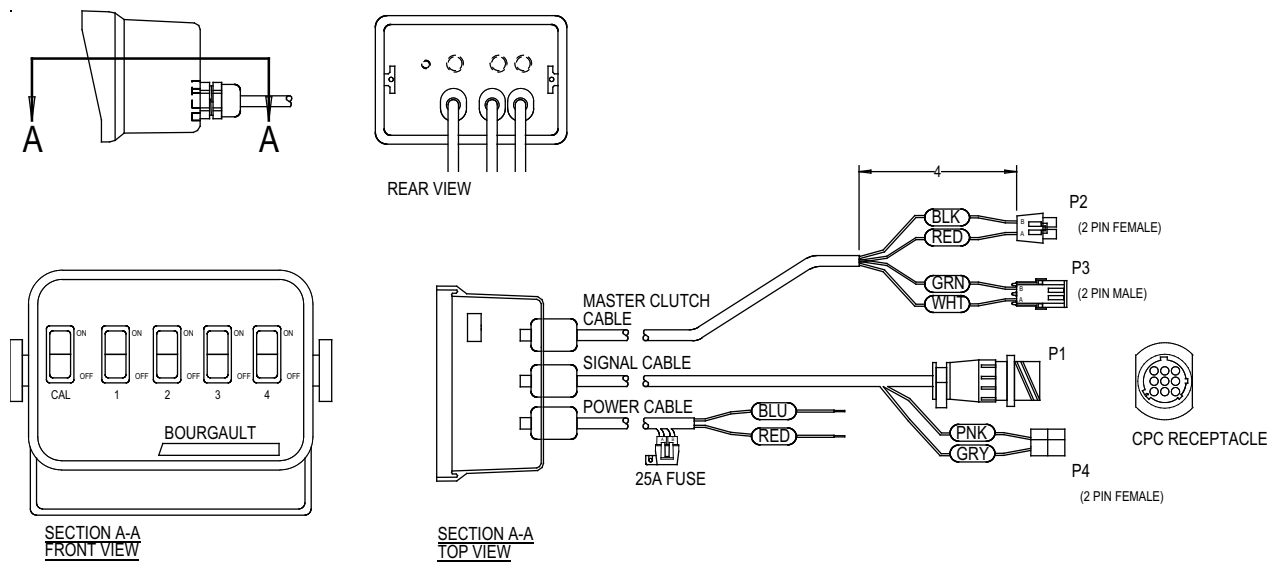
Multi Clutch Switch Box Extension Harness (On the AIR SEEDER Chassis) - 3120-72-02
